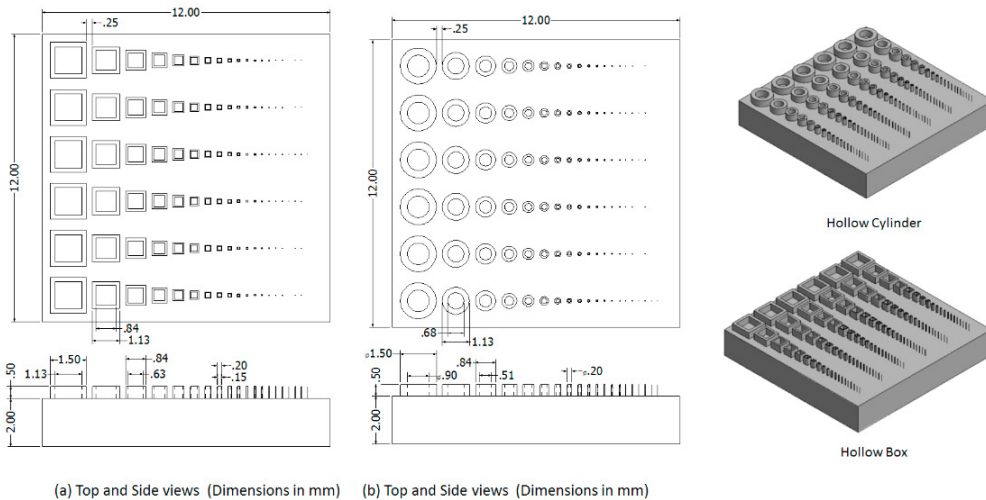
Top and side views of (a) hollow box, (b) hollow cylinder and isometric views
